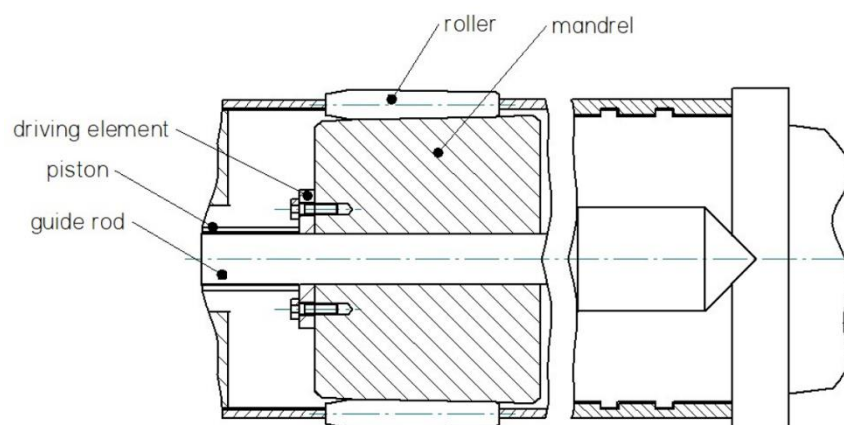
Hardening tool with depth adjustment of rollers via a piston.
